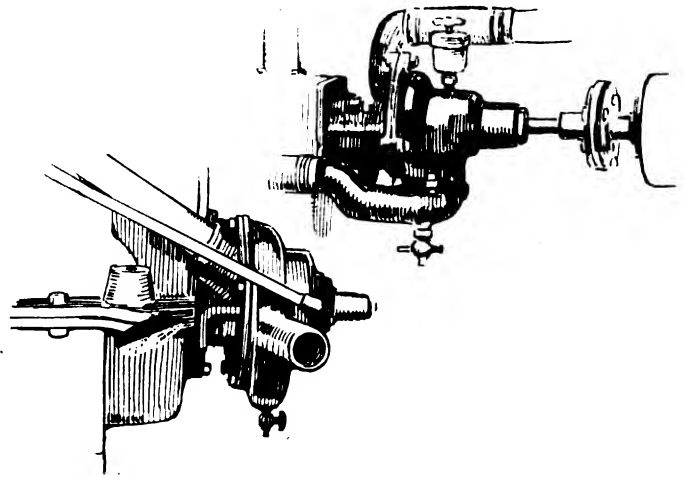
TWO EXAMPLES OF PUMP INSTALLATION
